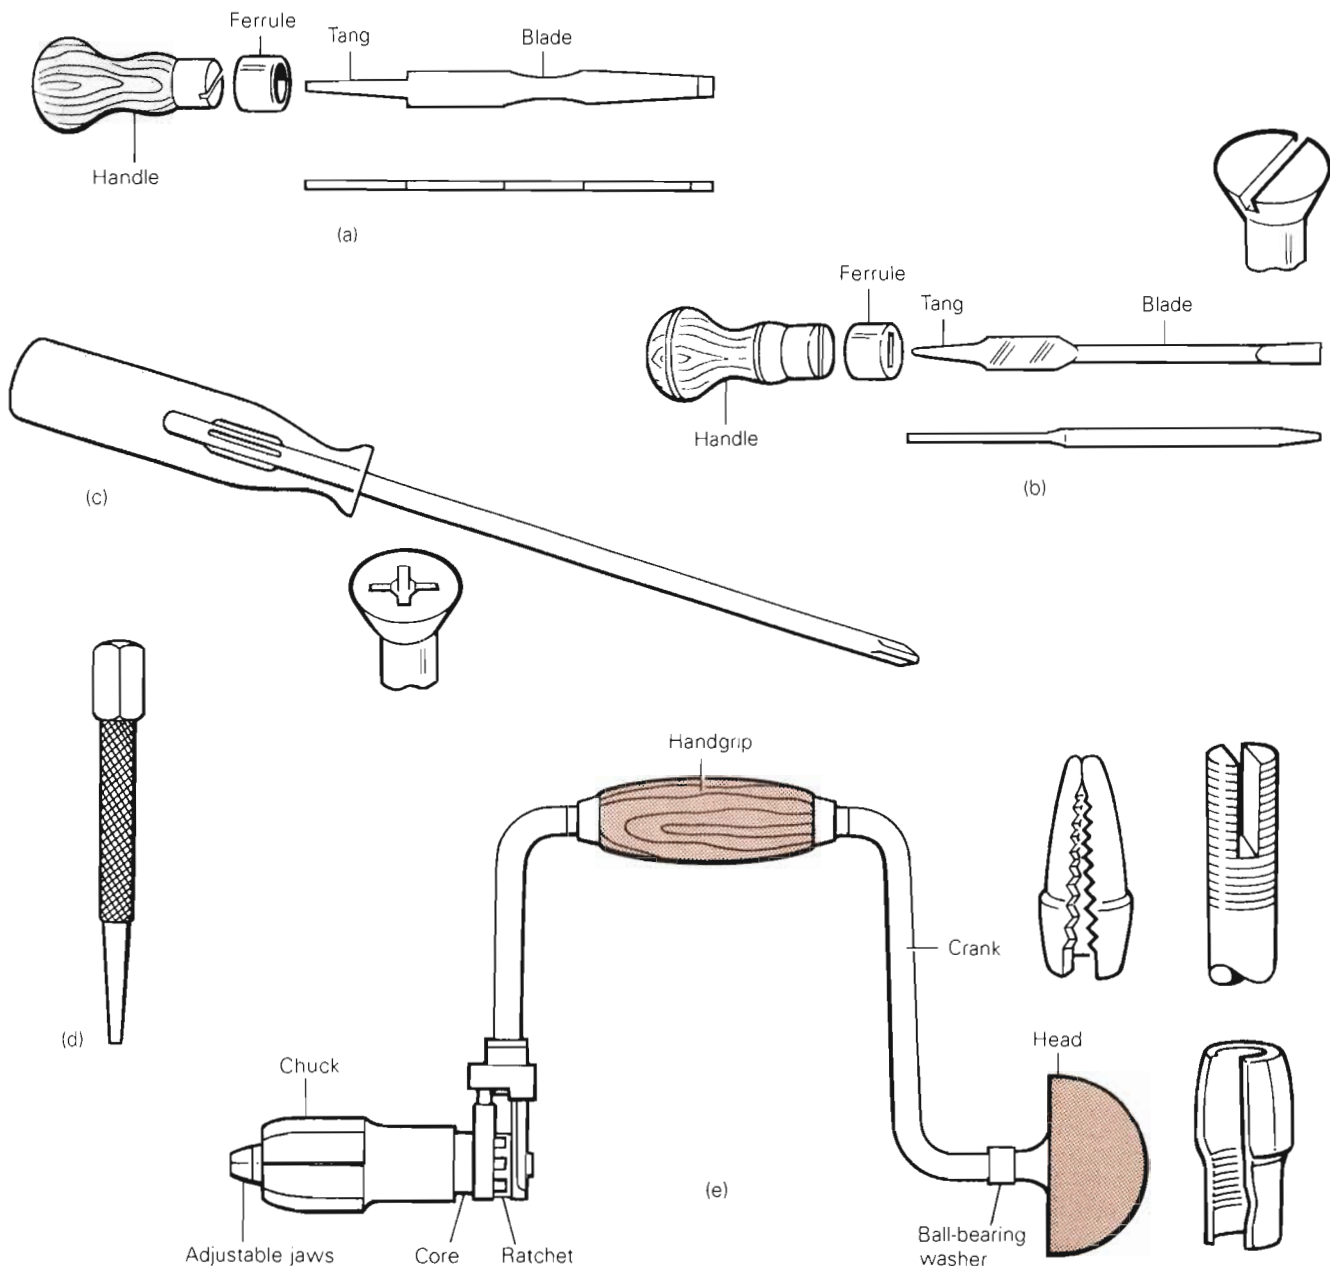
Impelling tools: (a) London pattern screwdriver, (b) cabinet screwdriver, (c) Phillips screwdriver, (d) nail punch, (e) brace.
